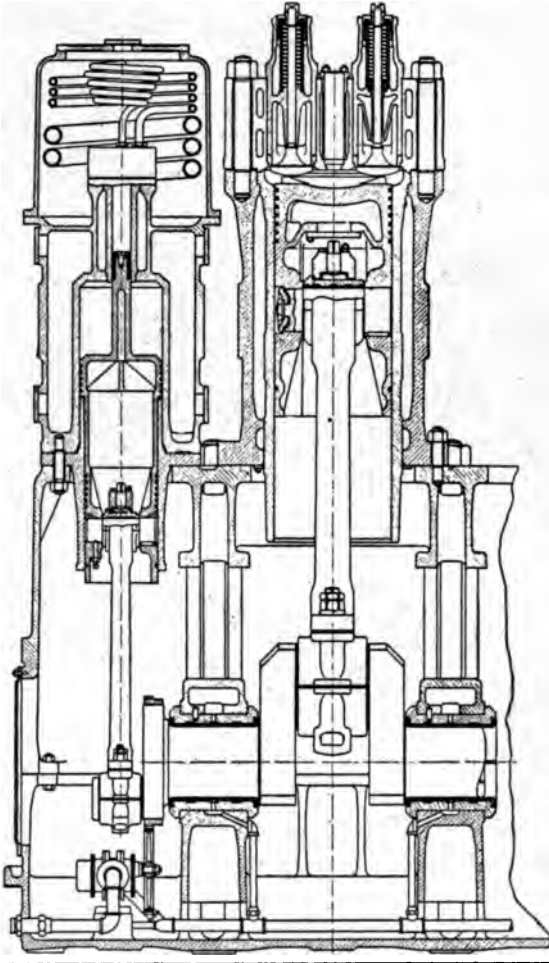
Section Busch-Sulzer Bros. Diesel engine.
